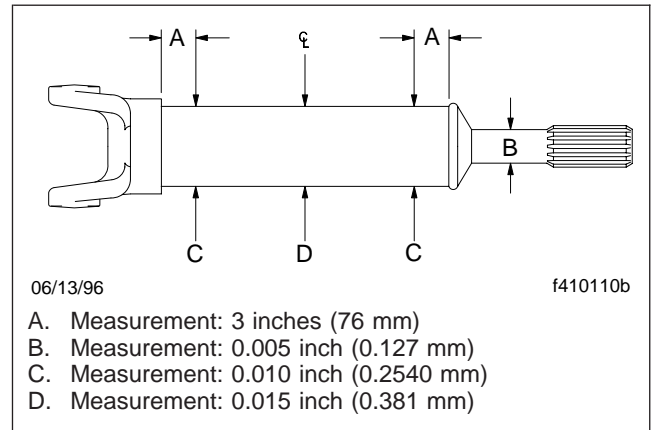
, Runout Specifications for a Rebuilt (or New) Driveshaft
